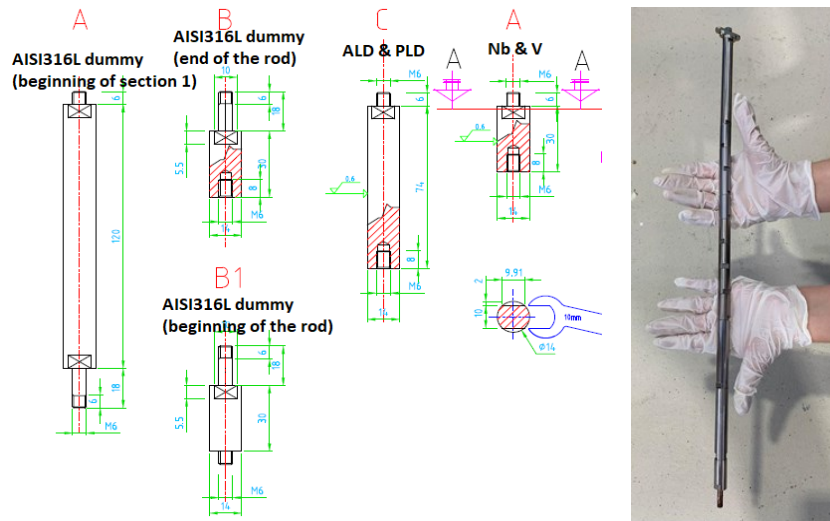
drawings of the specimens exposed to LiPb in this campaign (right) and picture of a rod of specimens before insertion in the test section (left).
